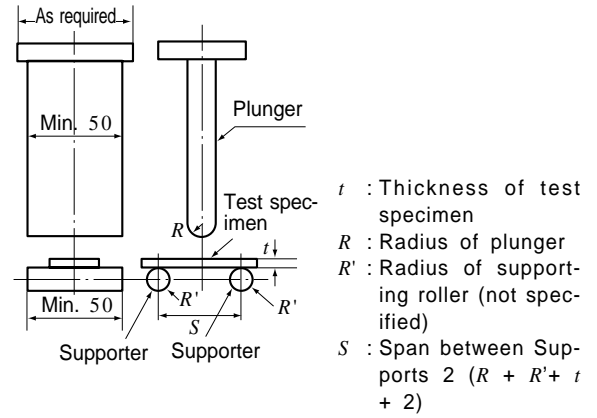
Jigs for Roller Bend Test (Unit: mm)
